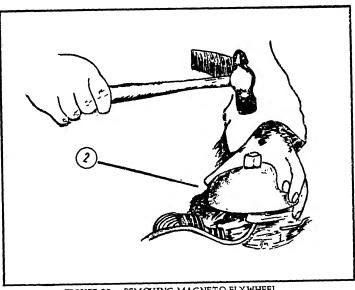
REMOVING MAGNETO FLY WHEEL. (Reference numbers shown on Legend, Figure 33.)
